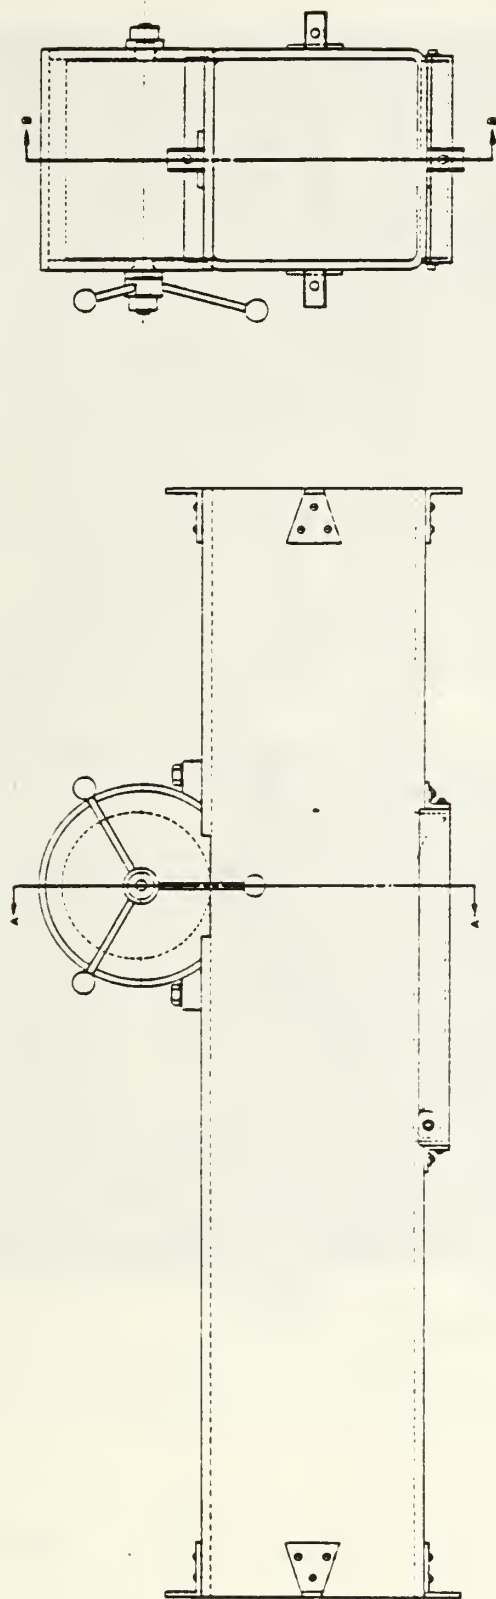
Ramp-and-Drum Back Pressure Valve Assembly
